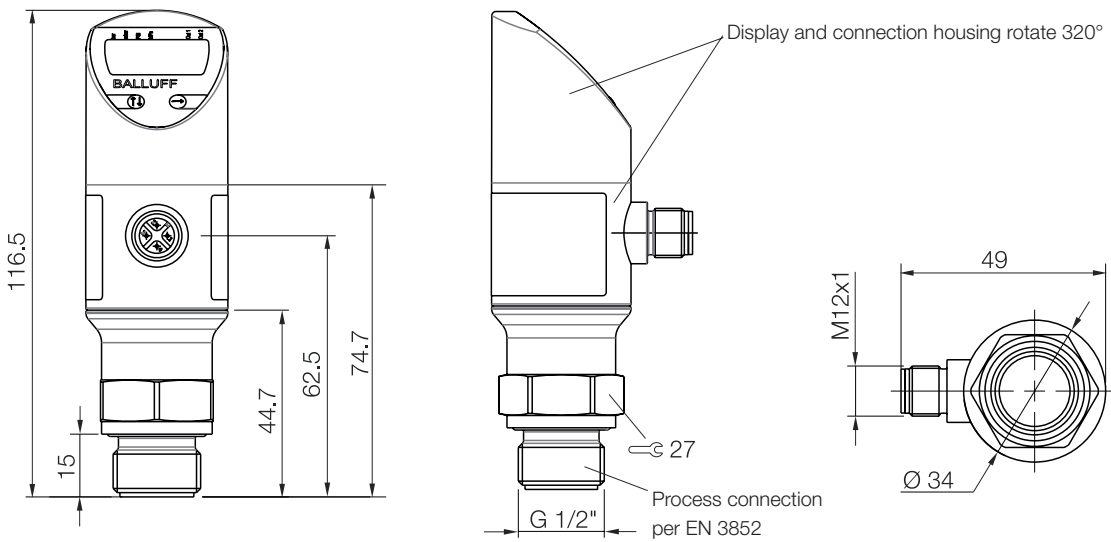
Dimensioned drawing of flush-mounted pressure sensors, up to 50 bar
